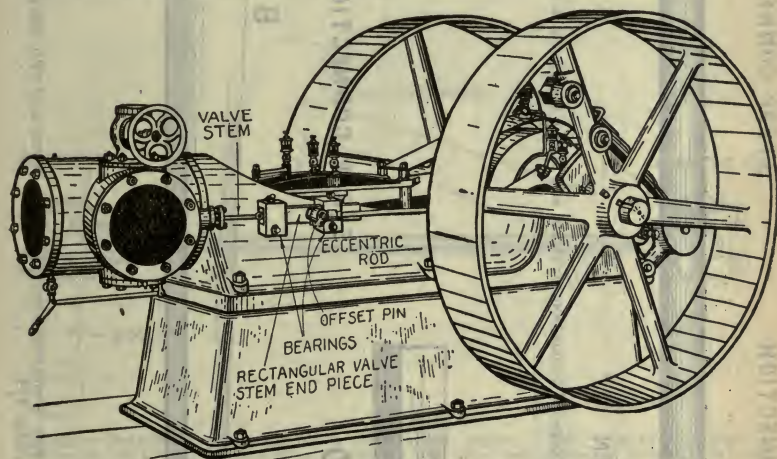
“Vim” horizontal automatic cut off engine with *direct* valve gear without rocker. The eccentric rod, as seen, is offset with pin attached to a wide rectangular valve stem end piece working in two bearings to prevent lateral or twisting motion.
